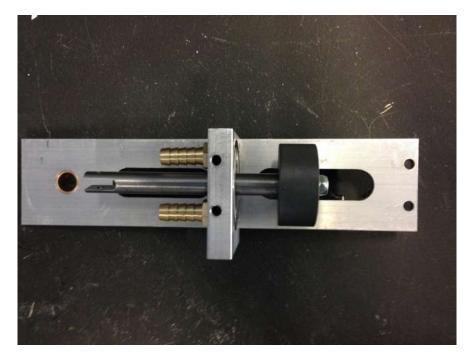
Back Mount Plate, Top End Cap, and Piston Assembly
